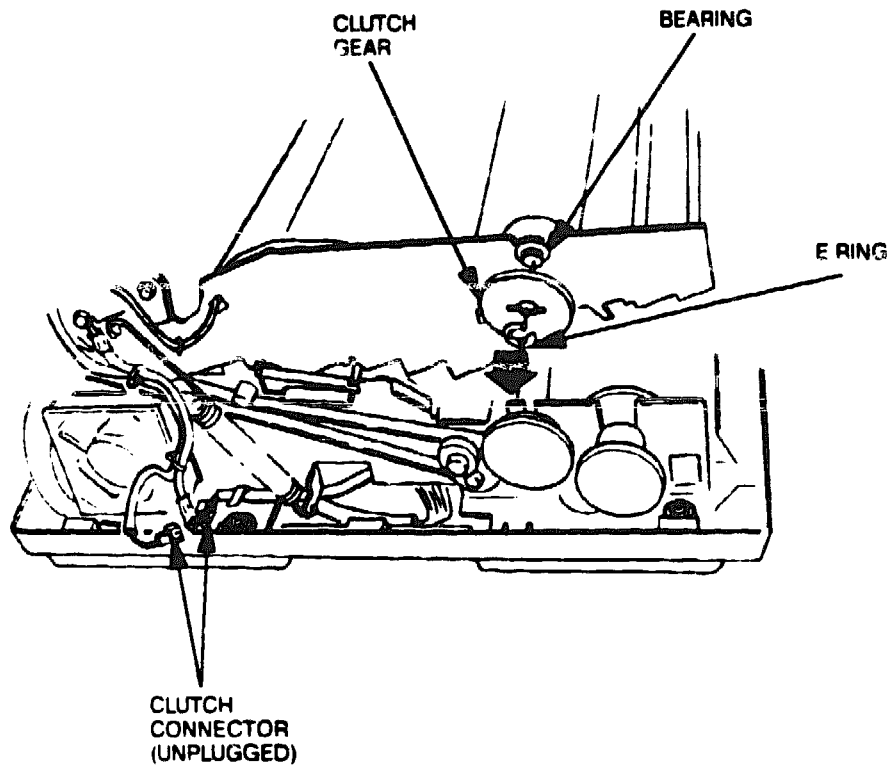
Electromechanical Clutch Cable, Cable Tie, Clutch Gear, and Bearing
